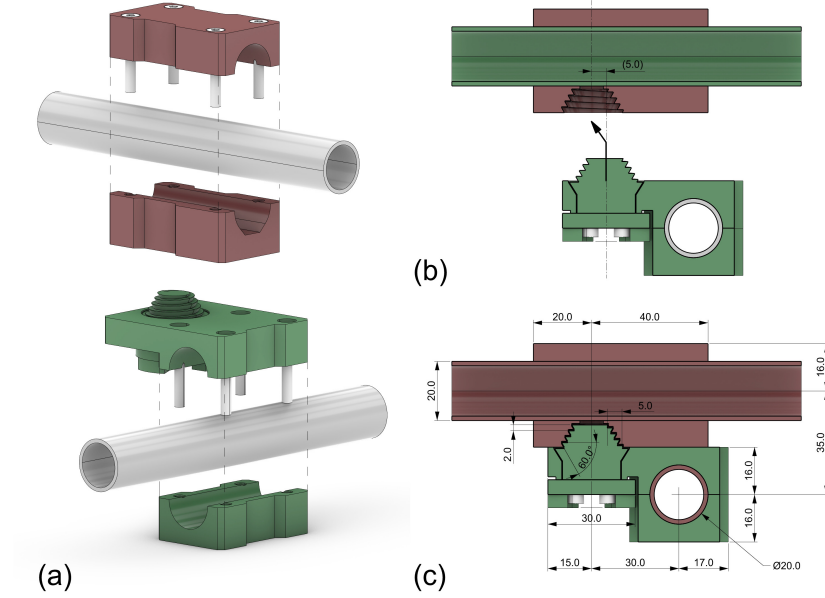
Drawing of the T20-5 connector showing (a) direction of attaching the joint to tube during preassembly; (b) Joint halves positioned at maximal misalignment before assembly; (c) after assembly.
